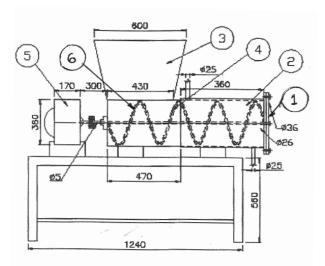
Orthographic drawing of machine 1 – die plate; 2 – heat exchanger barrel; 3 – hopper; 4 – main barrel; 5 – gear box; 6 – screw
